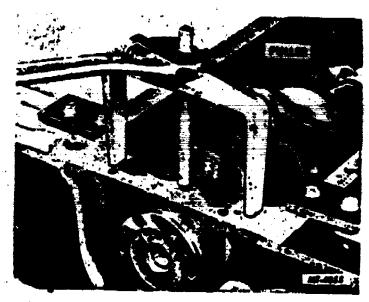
Removing Rear Main Bearing Cap with SE-1719 Puller
